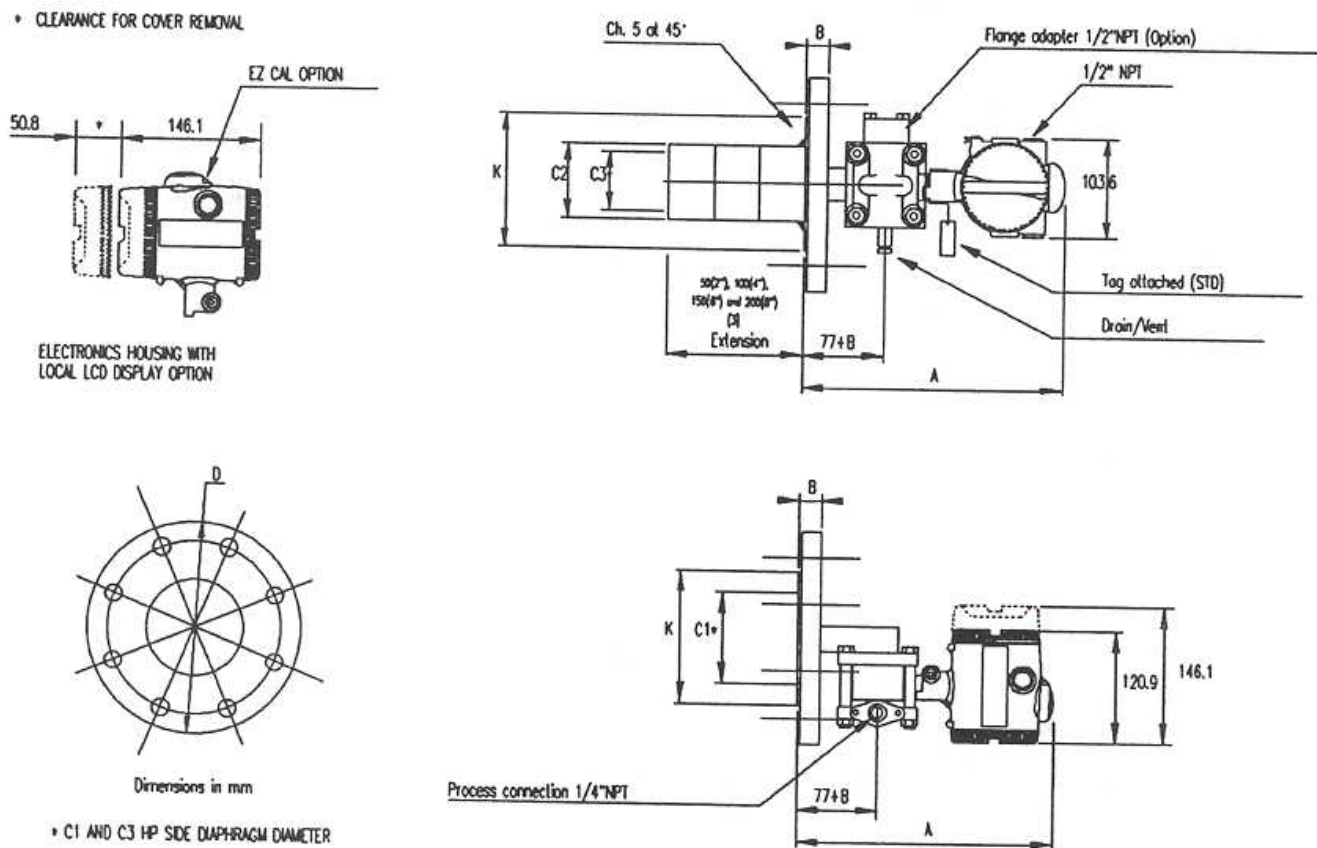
External and Mounting Dimensions for Type PTSDN Intelligent Transmitter - Version 1.
